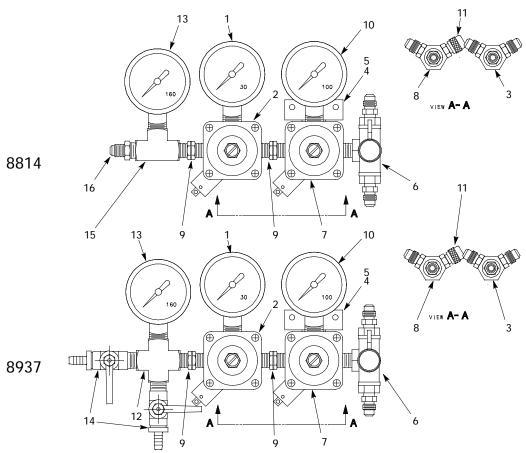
SECONDARY CO₂ REGULATOR ASSEMBLY
